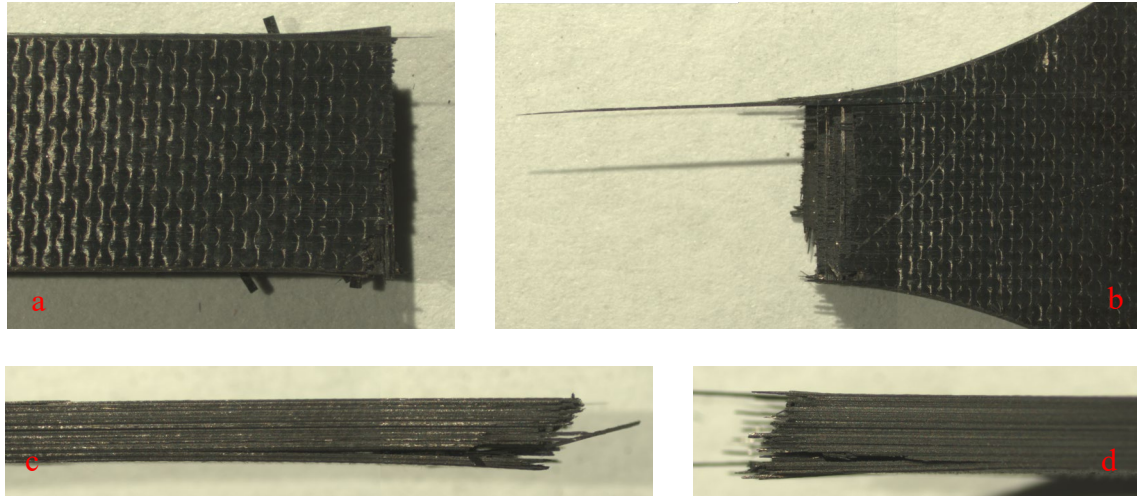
Stitched images of the 0/90 NanoStitch composite specimen NS-07-26 tested in tension to failure. (a-b) face view and (c-d) side view.
